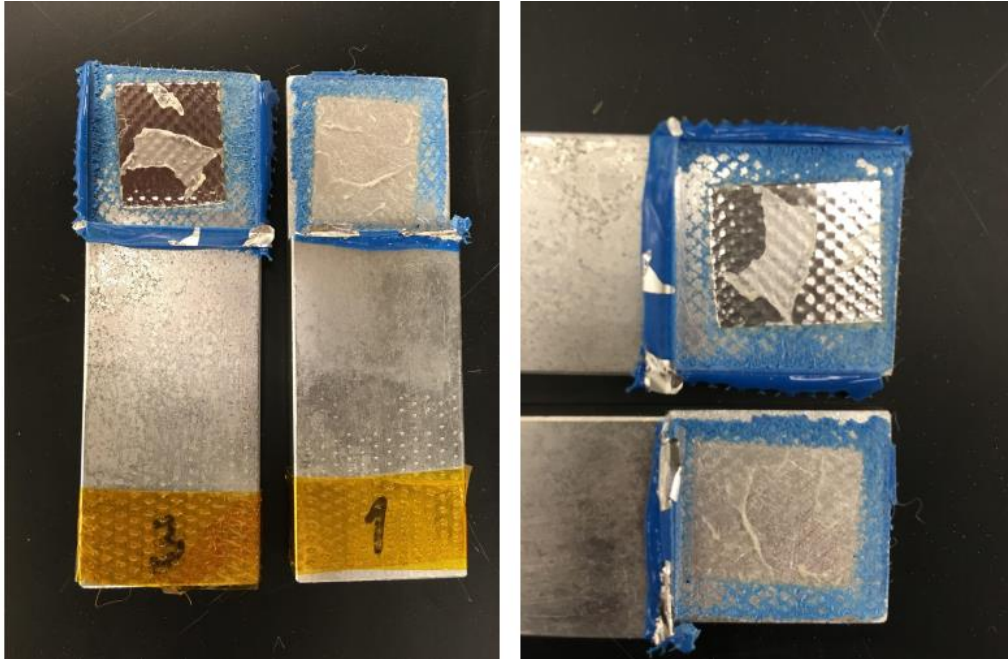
S10-1-3-R42- Fracture Surface
